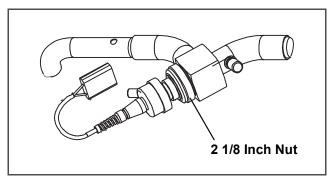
Hermetic Thermostatic Expansion Valve Brazing Procedure
